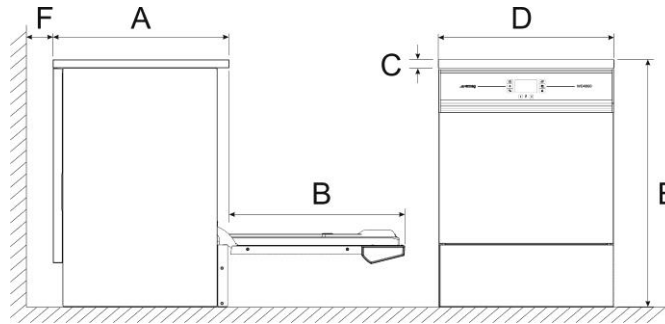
Schematic drawing 45CM and 60CM, overall dimensions of the product
